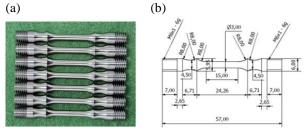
(a) Fabricated specimens for creep tests, (b) drawing of the specimen
